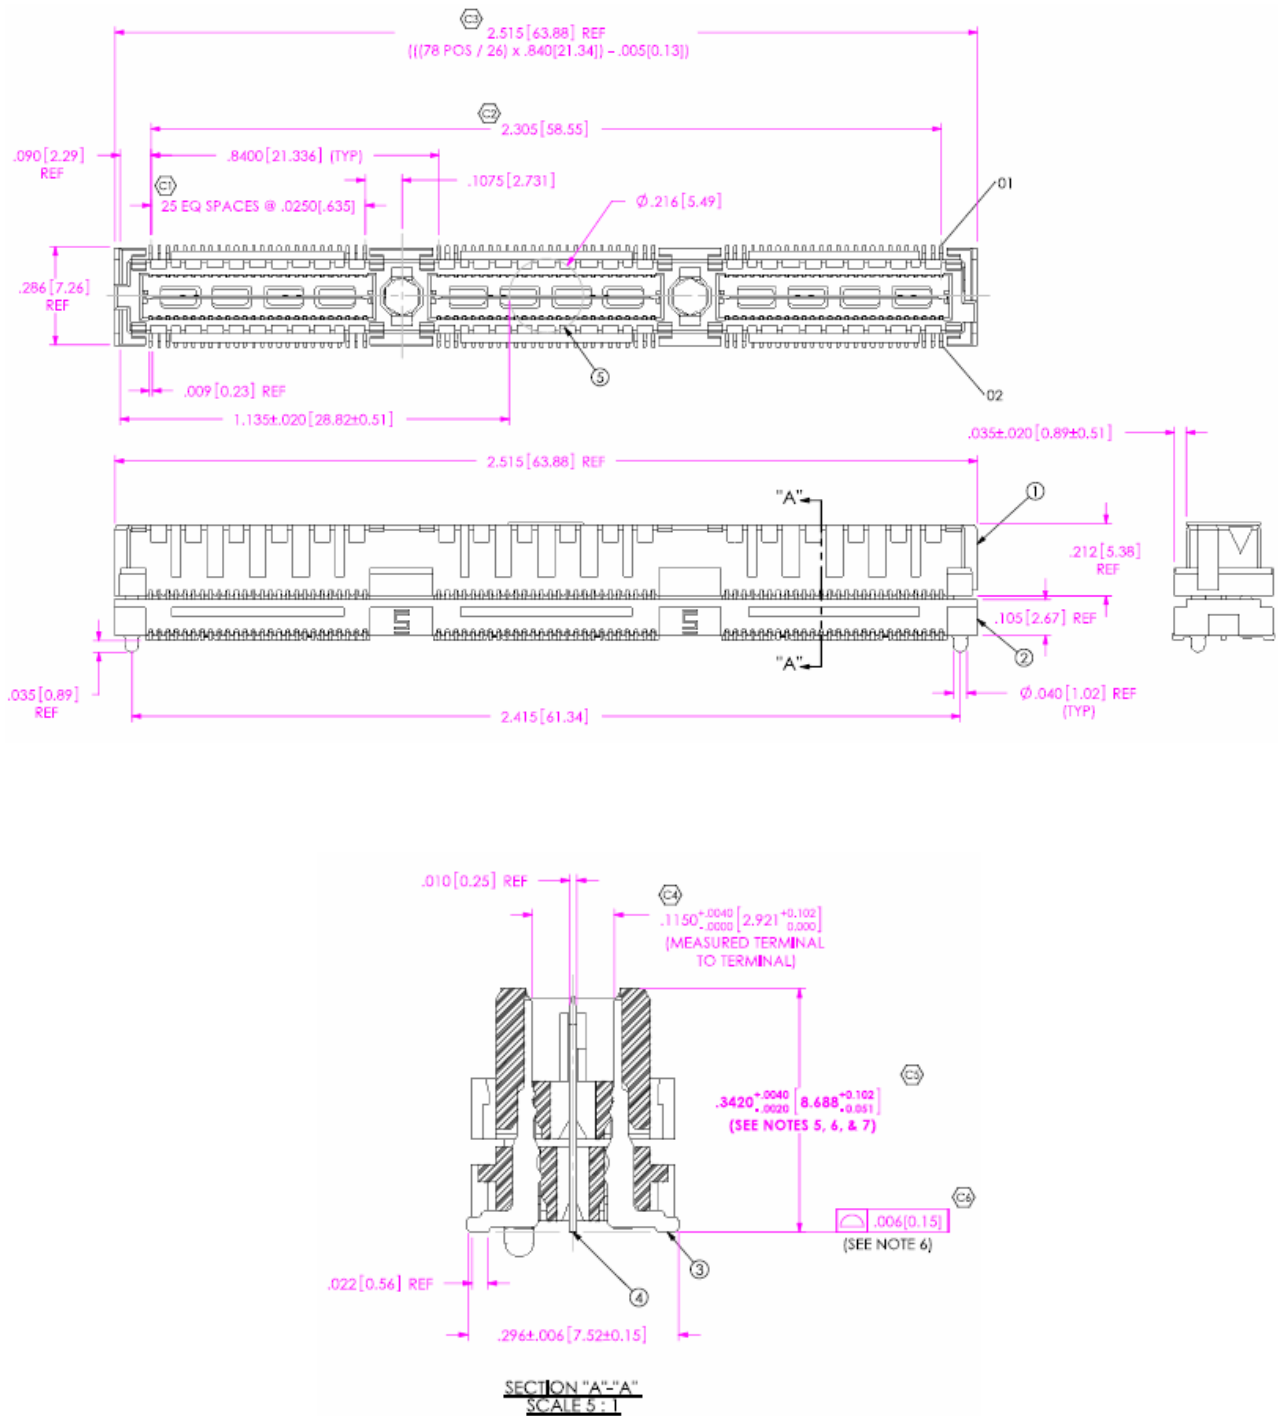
ASP-129637-03 or equivalent Mechanical Drawings
